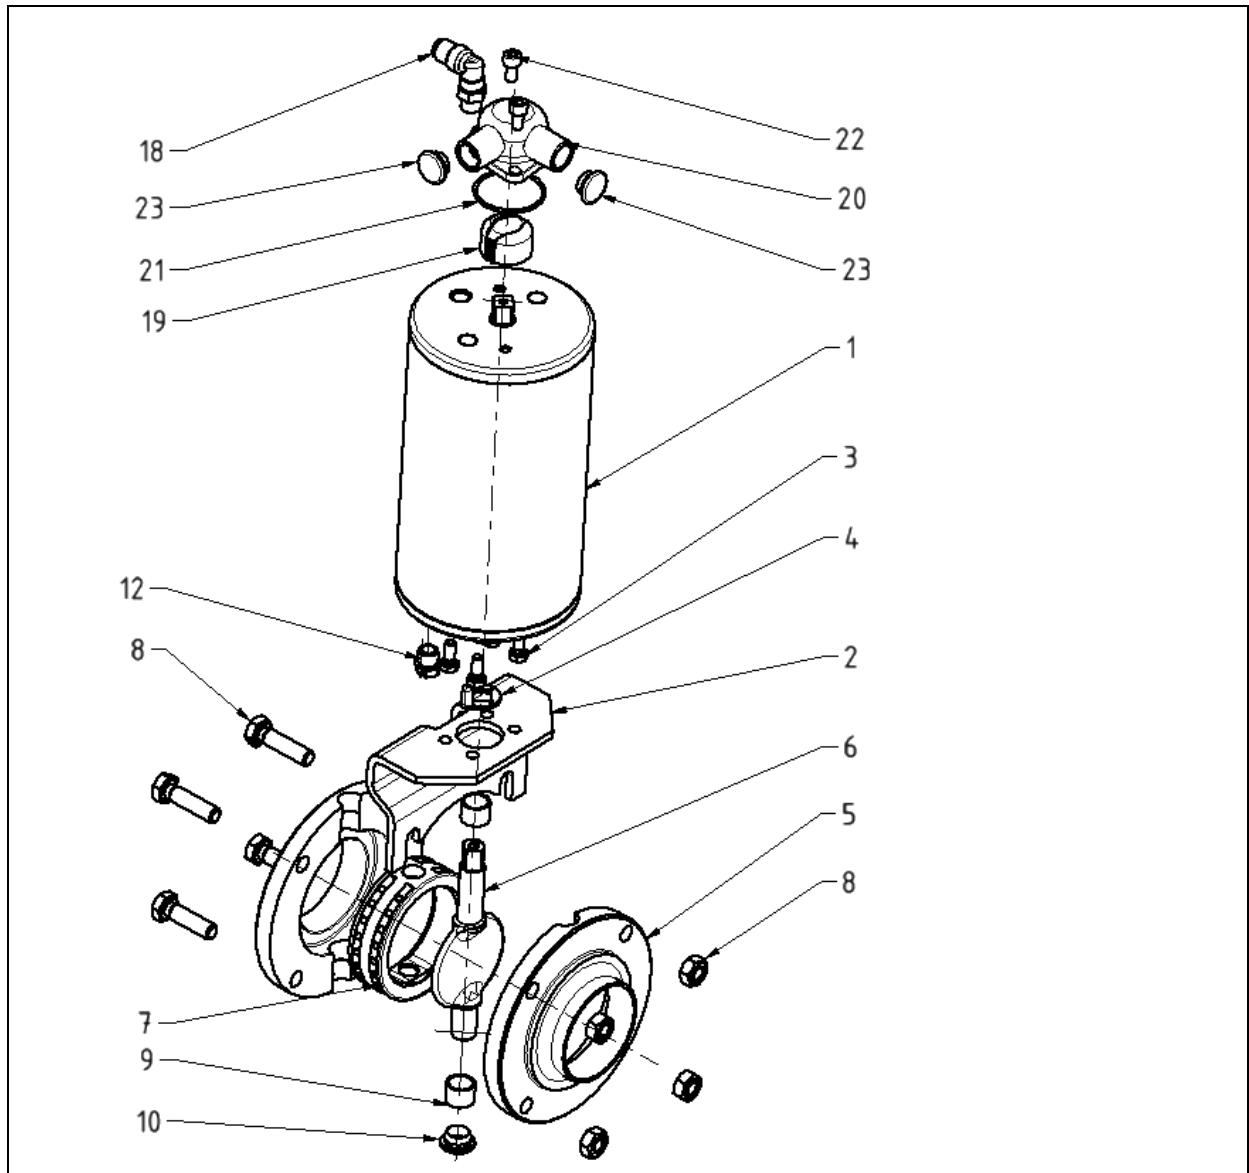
Structure of Butterfly Valve with Pneum. Actuator
